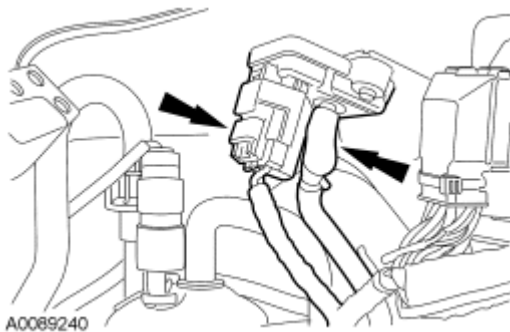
Locating Manifold Absolute Pressure (MAP) Sensor Vacuum Tube & Electrical Connector
